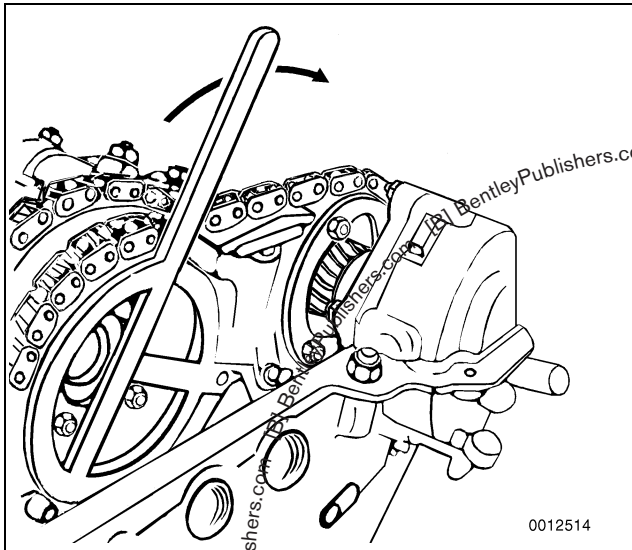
On VANOS control unit with spring plate (cars built 3/95 and later), rotate exhaust camshaft sprocket clockwise until intake camshaft contact stop. BMW special tool 11 5 490 shown.
